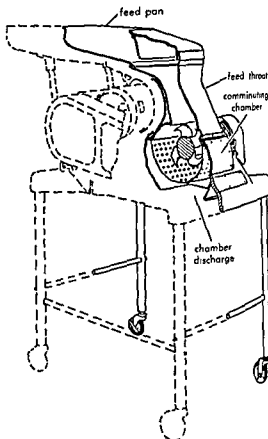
Comminuting machine. (W. J. Fitzpatrick Co.)
